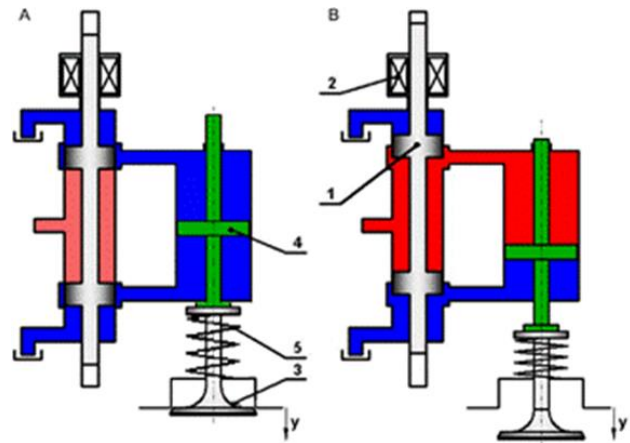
Functional model of an electrohydraulic double-acting drive with spring outside the drive: 1 – slider of solenoid, 2 – electromagnetic coil; 3 – valve, 4 – cylinder piston, 5 – spring of cylinder piston (also valve spring)
